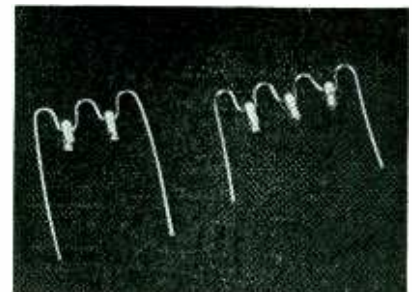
Tungsten heater wires with aluminum slugs in place ready for evaporation. Assembly at left is for ten-inch picture tube; at right for twelve-inch
